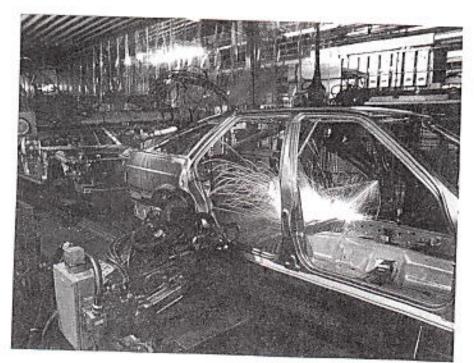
Welding is commonly done by robots. Weld placement can be precisely controlled.
